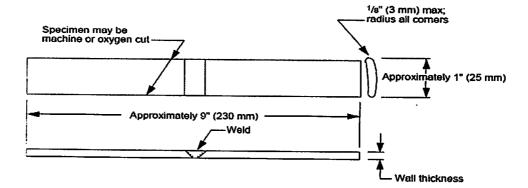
Root and Face Bend Test Specimen: Wall Thicknesses Less Than or Equal to 0.500 in. (12.7 mm)
